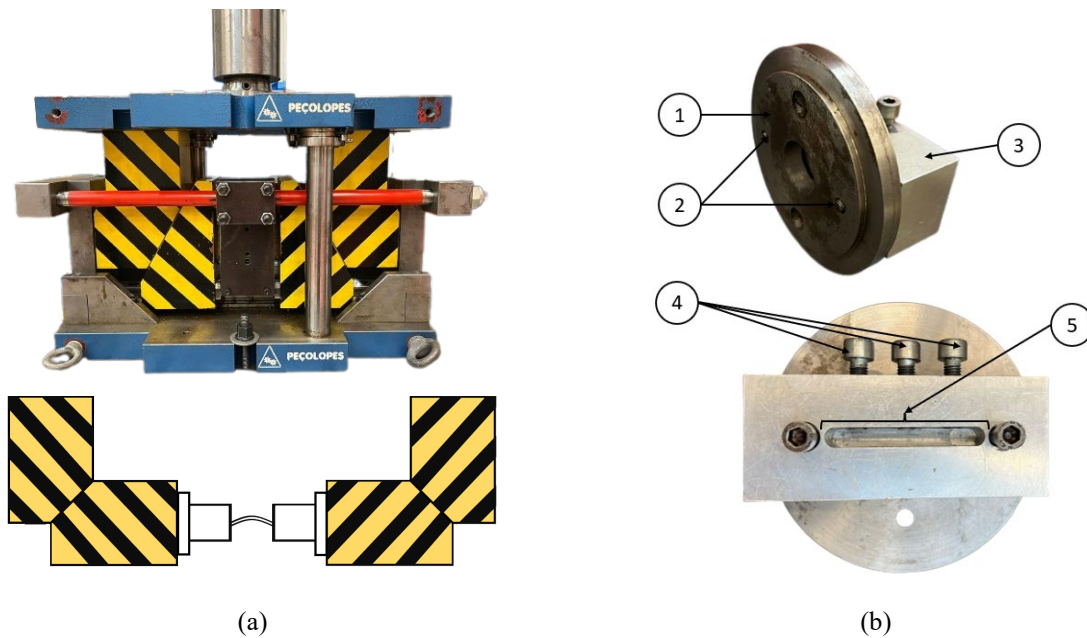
Photograph of (a) the double-action tool system [2] and (b) the tool to fix the in-plane compression test specimens: 1) die shoe; 2) fixation bolts; 3) sheet holder block; 4) sheet holder bolts; 5) sheet holder block slot.
